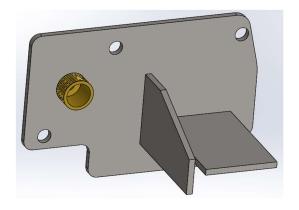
Positive crankcase pressure relief valve plate with designed baffles
